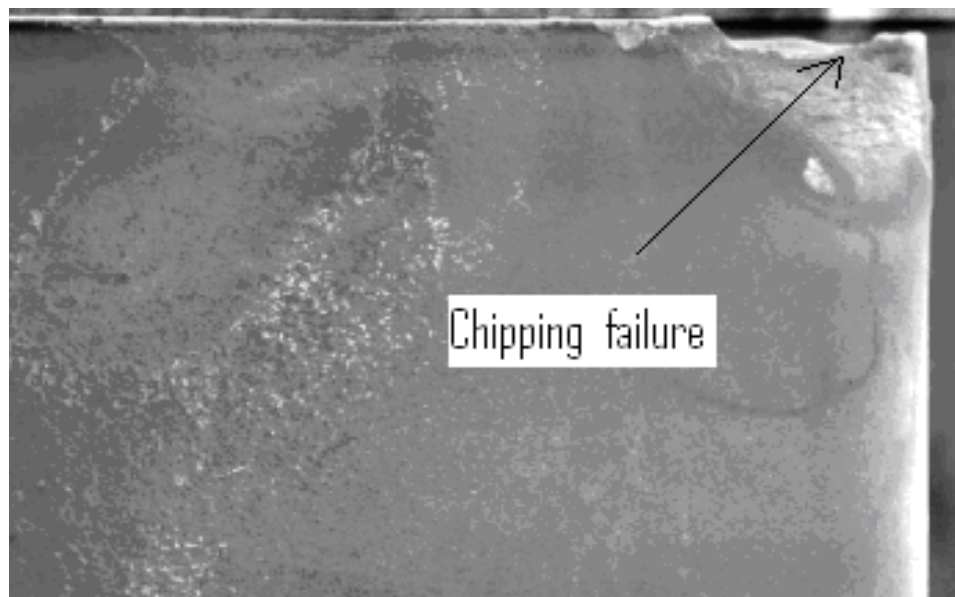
Cutting tool - Chipping Failure due to impact load
